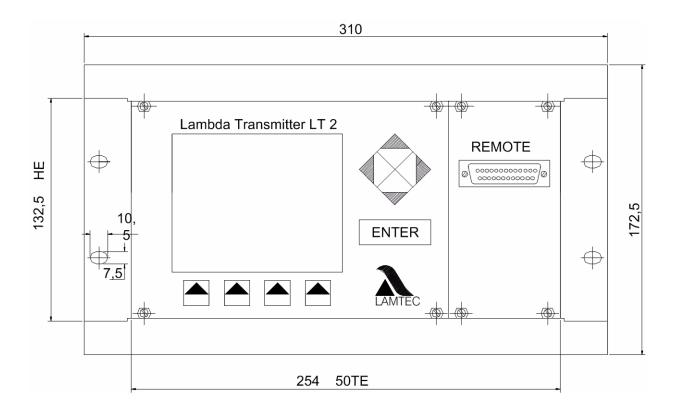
Dimensional diagram: LT2 panel installation front
